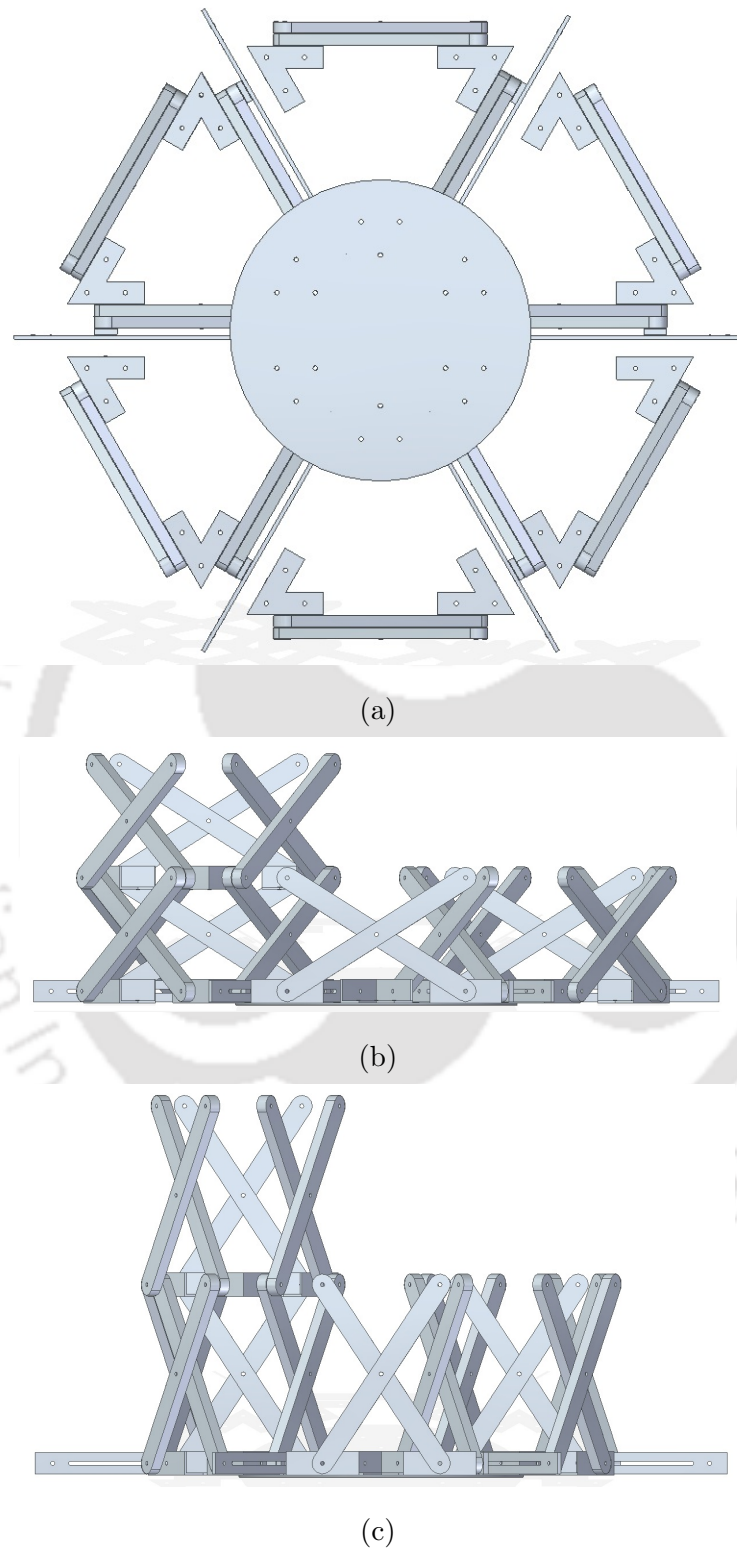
CAD model of different isometric view of triangular-prism-shaped scissor linkage that is supported by slider-jointed base.
